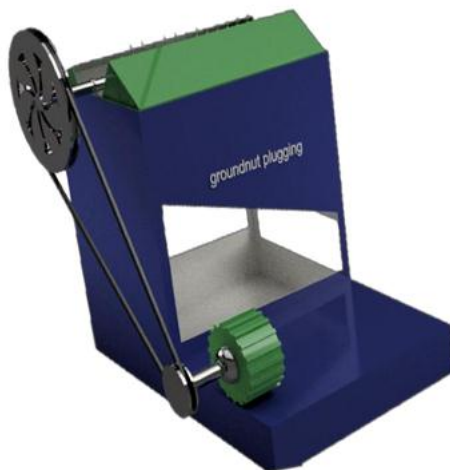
Layout of Proposed Working Model (3 D Drawing)
